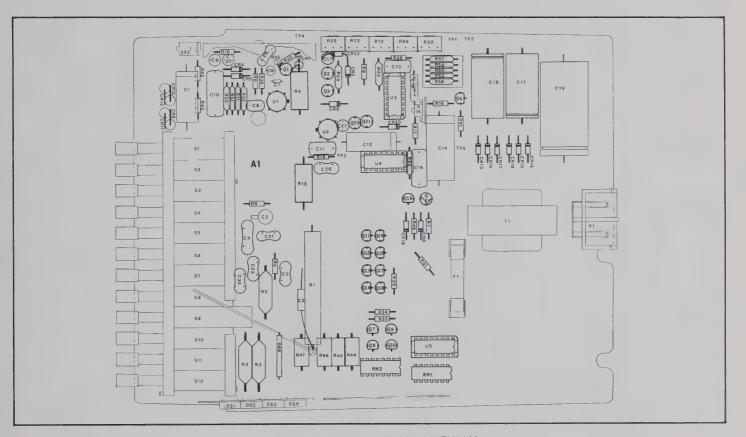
8000A MAIN PCB ASSEMBLY
